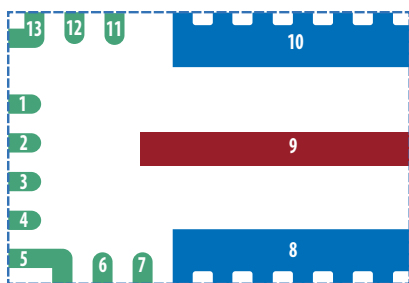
EPC23102 PQFN 3.5 x 5 mm bump layout
